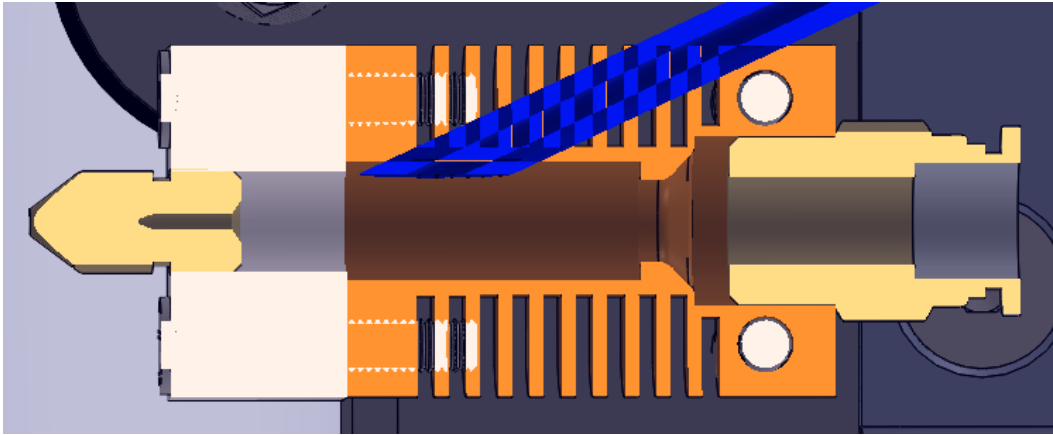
A section view of the radiator, nozzle and heating block with the CCF PTFE tubing inserted.
